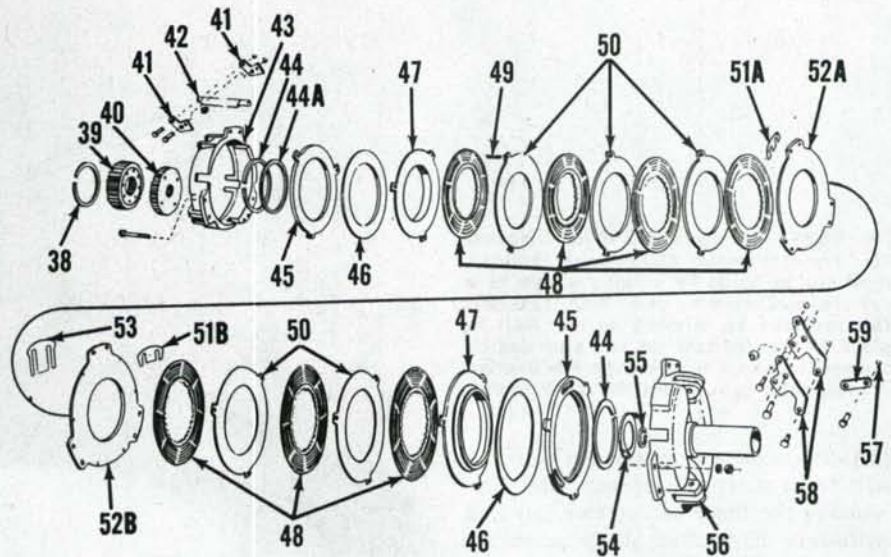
Exploded view of "Power-Director" clutch assembly. Unit is equipped with more drive and driven plates than shown. Refer to text.
